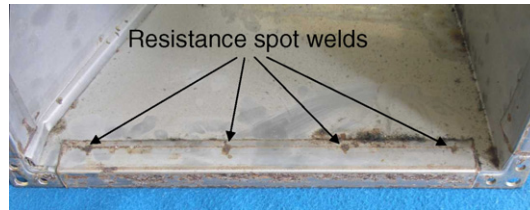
Inside view of the ventilation duct element with corrosion centres close to the spot welded assembly flange.
